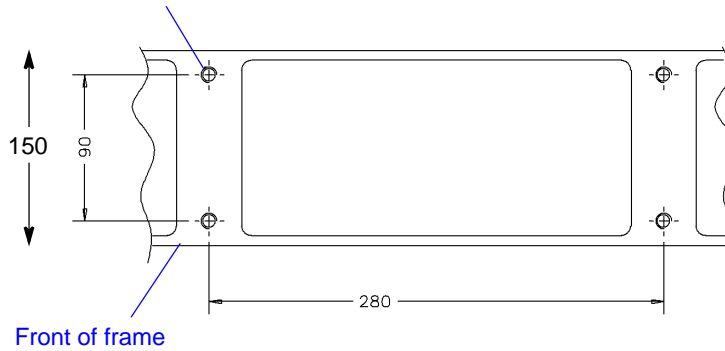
Series 5560 Standard Configuration - Top Plate Mounting Dimensions
